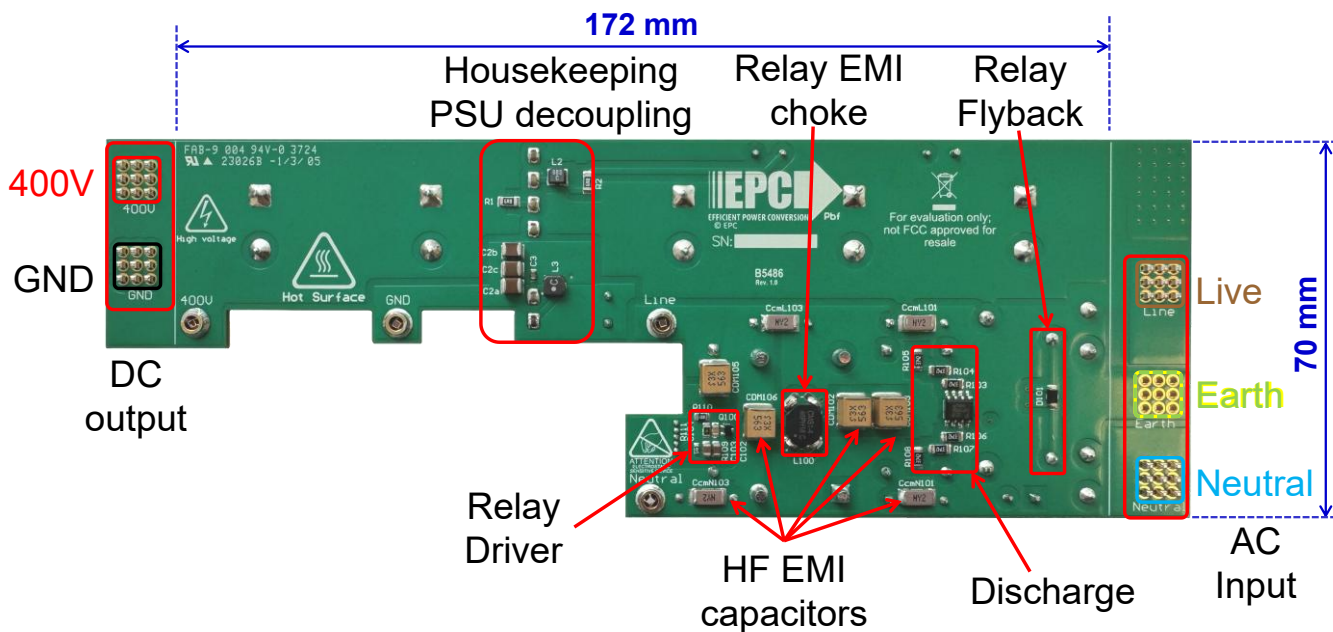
Bottom view of the EPC91107KIT motherboard EPC91107M showing the main circuit elements.
